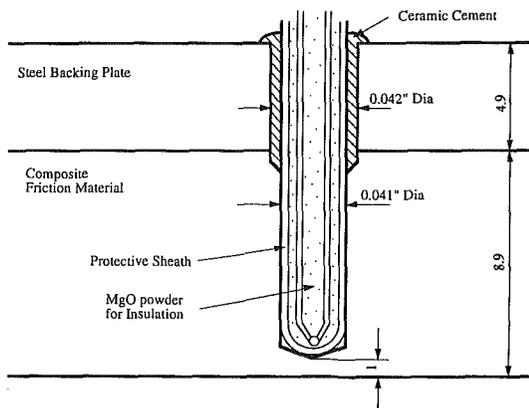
Typical thermocouple installation in the brake pad (all dimensions in mm unless notified)
